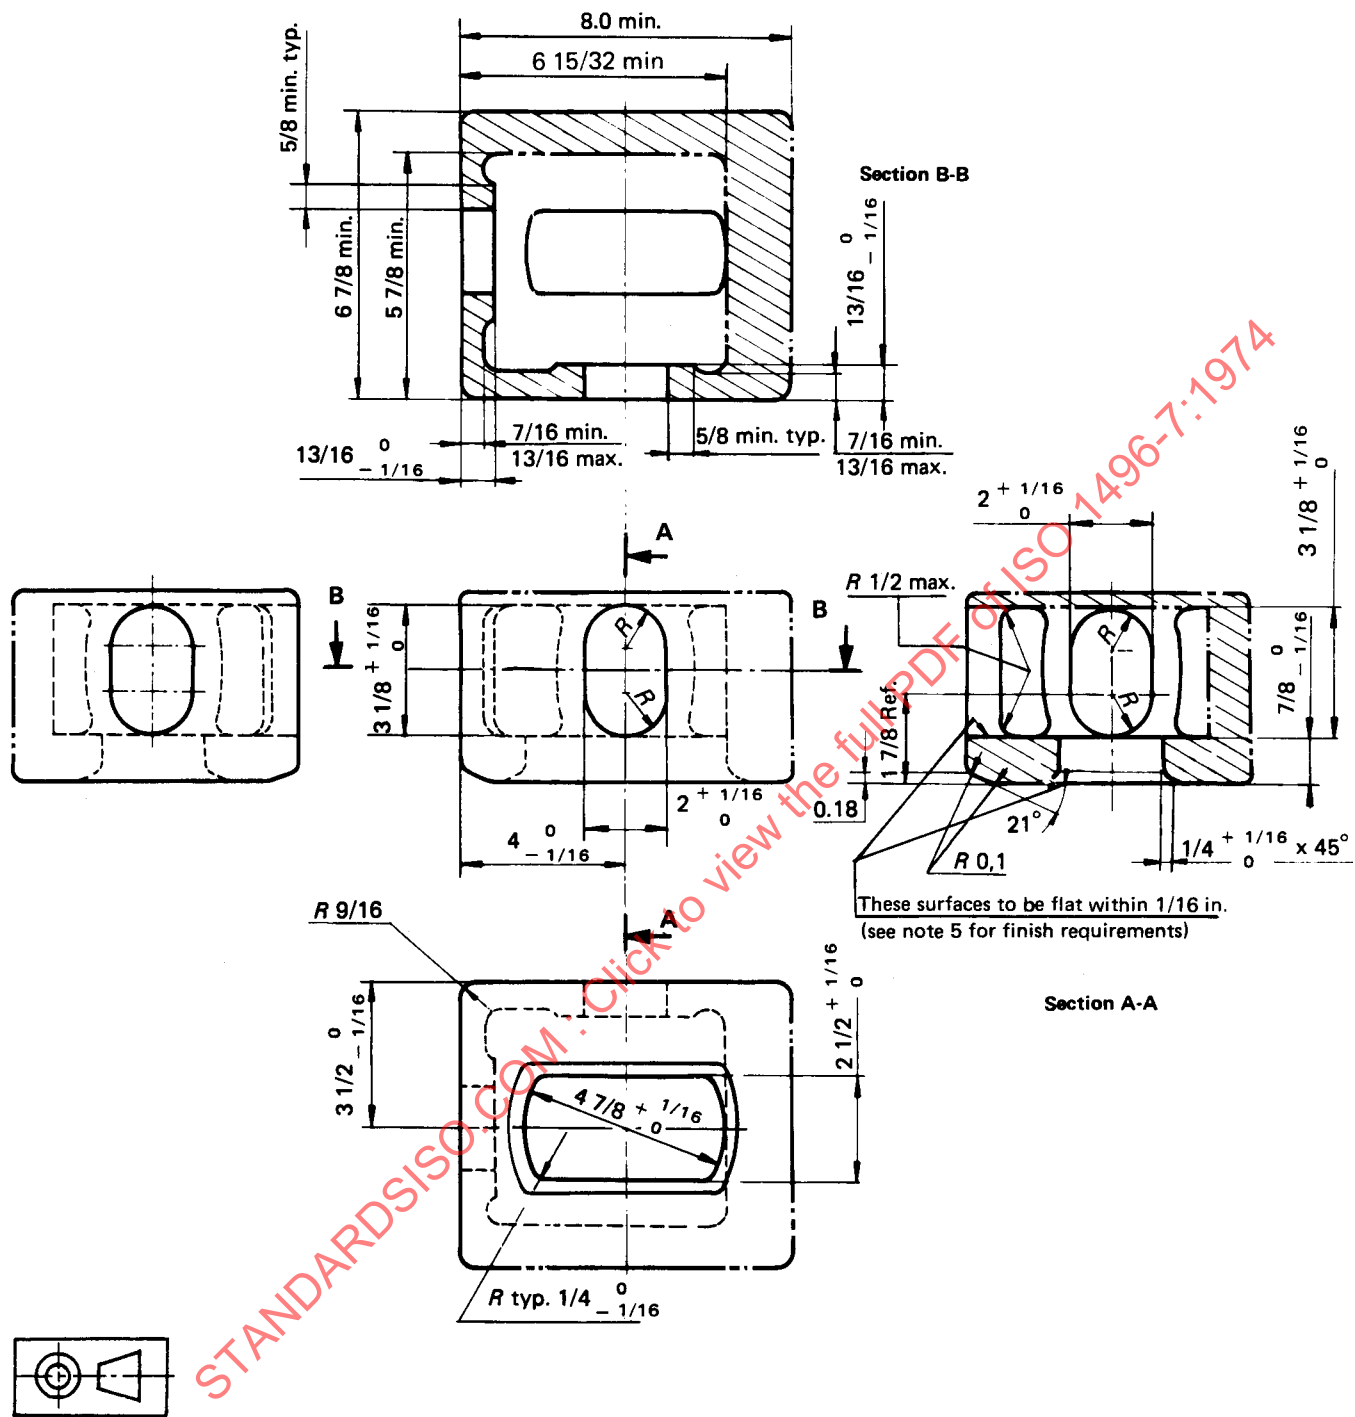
Bottom corner fitting — Dimensions in millimetres (see figure 10)
